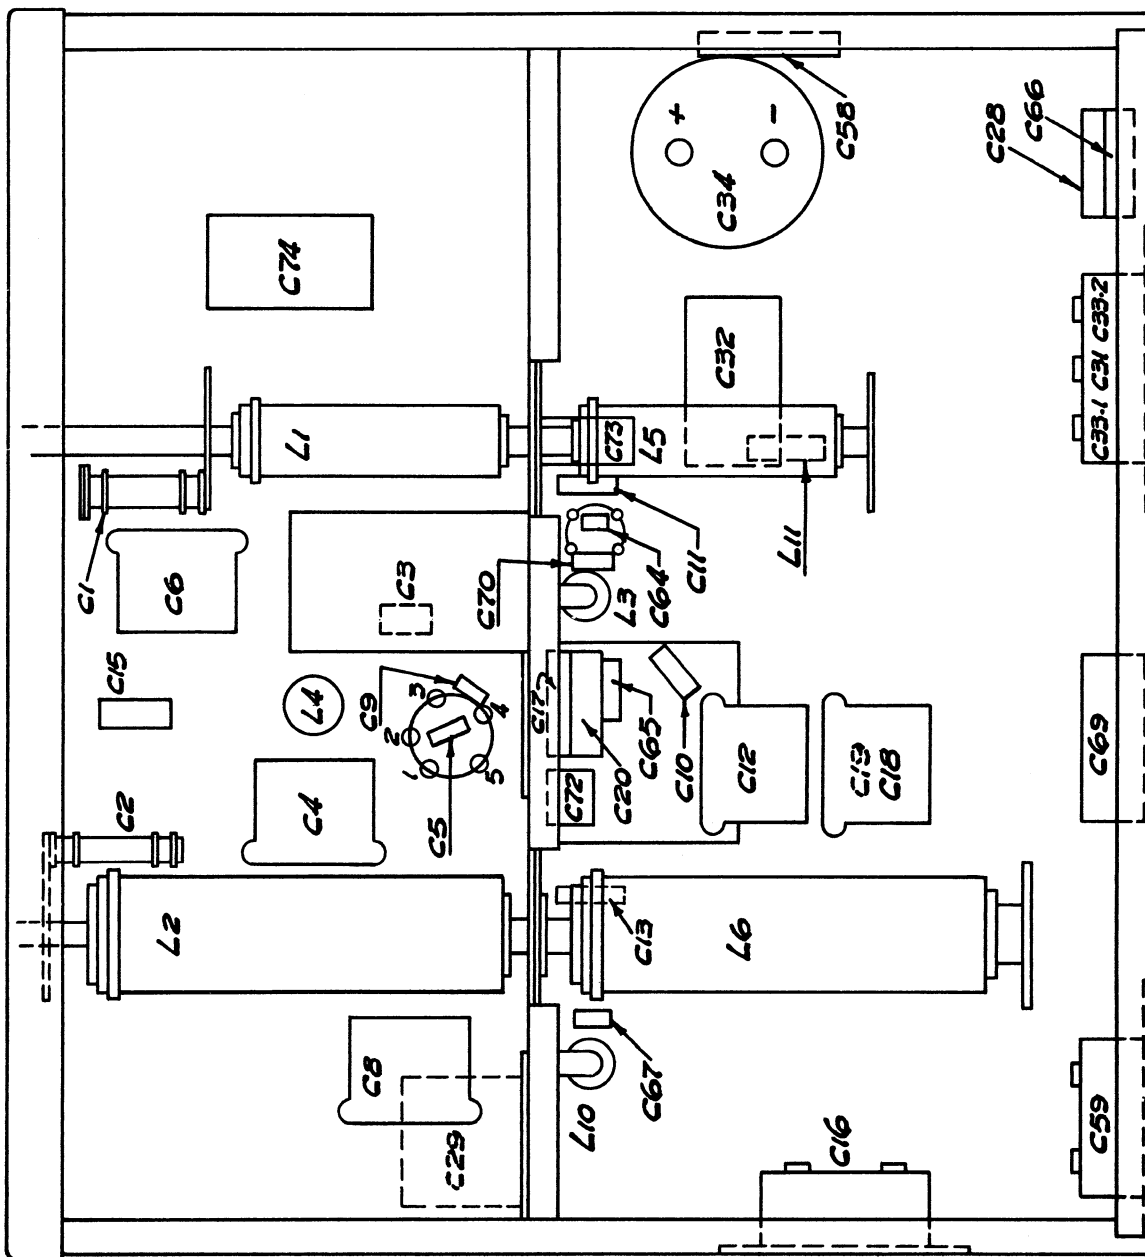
GENERAL PURPOSE TRANSMITTER CHASSIS ASS'Y. BOTTOM VIEW
